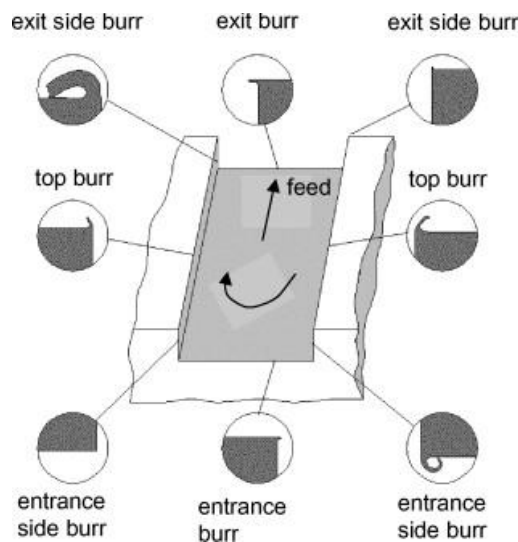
Types of burrs in milling(Hashimura et al. 1999)
